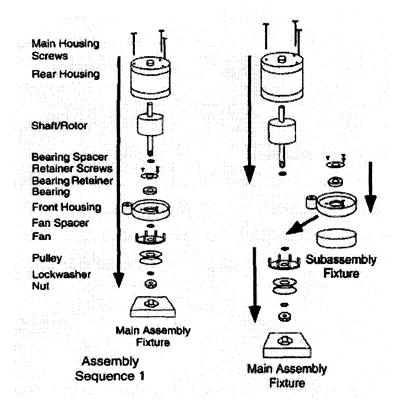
An example of assembly sequence without subassembly (left hand side sequence) and with assembly (right hand side sequence)
